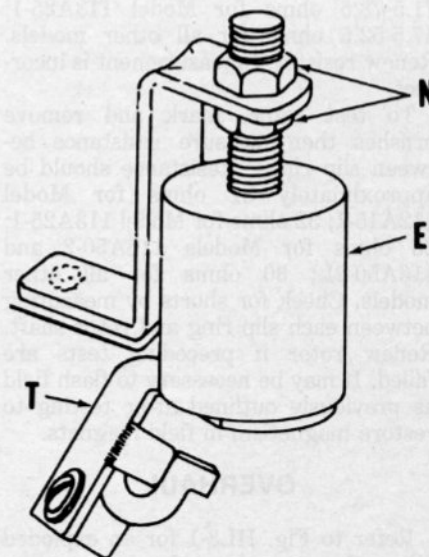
Loadamatic® Automatic Idle Control is adjusted by turning nuts (N) until bottom of electromagnet (E) is parallel with throttle arm (T). Do not bend throttle arm or electromagnet bracket.
